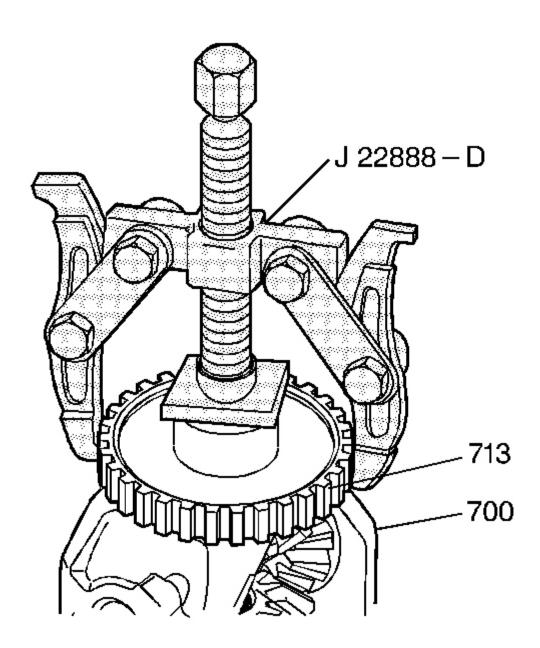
Removing Vehicle Speed Sensor Reluctor Wheel Courtesy of GENERAL MOTORS CORP.
